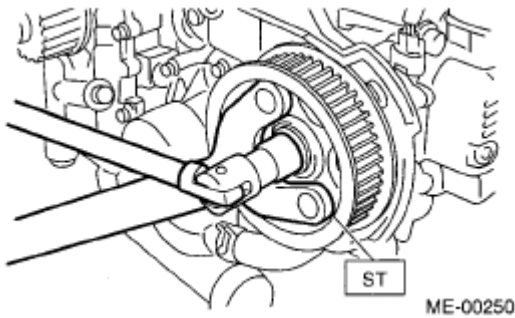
Identifying Cam Sprocket No. 2 Using Cam Sprocket Wrench ST (18231AA010)
